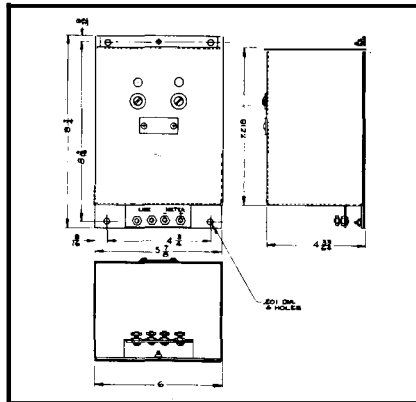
Outline Dimensions and Drilling Plan for Transducer used with Frequency Meter.
